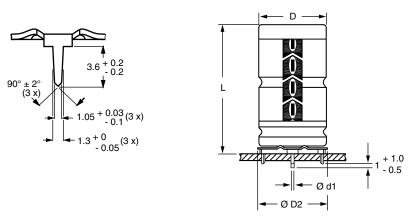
Mounting hole diagram and outline; form MR: With mounting ring and pins
